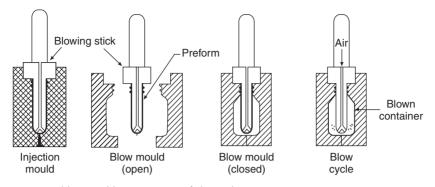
Injection blow moulding. (Courtesy of The Packaging Society.)
